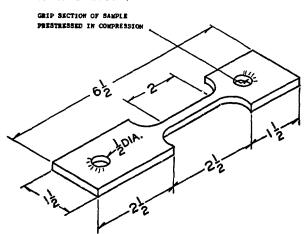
Typical Tensile Sample Showing Pin Grip Design According to ASTM Std E8-69. ASTM Std Dimensions Modified in Various Dimensions to Suit Material Strength and Test Situation. After machining, the tensile samples were given various heat treatments in air, argon, or vacuum. The summary of heat treatments for all samples is given in Appendix B. After heat treating, the pinholes on most of the samples were prestressed by inserting a 0.5-in. dowel pin and compressing the load-bearing portion of the samples (Fig. 1) with a load in excess of the expected test load.
